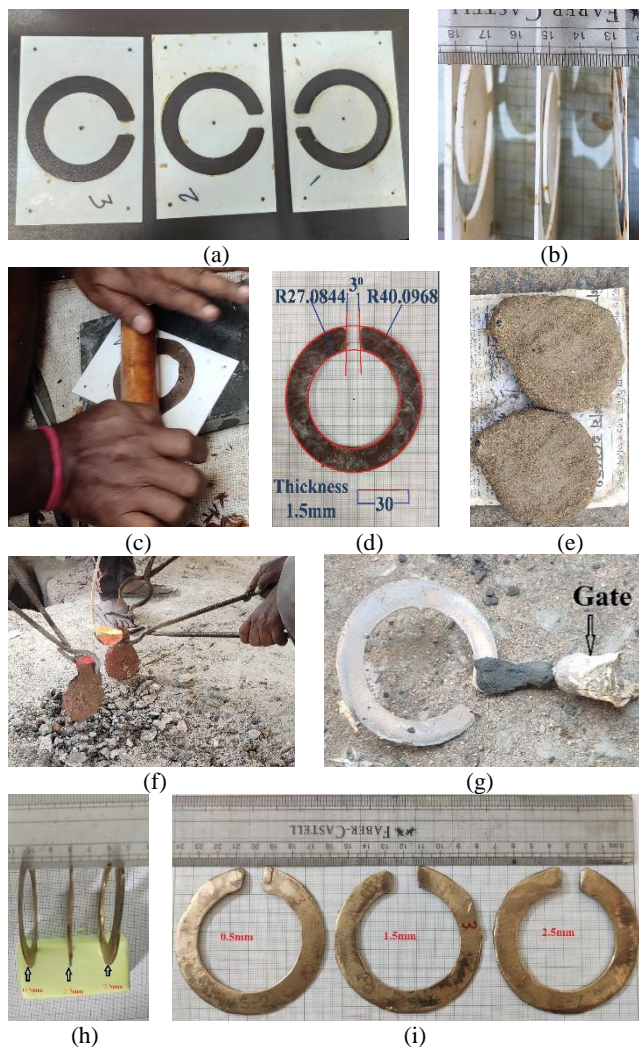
Different steps of sample preparation (a) Die (b) Side view of die (c) Wax pattern making (d) Complete wax pattern (e) clay moulds (f) Liquid Metal pouring, (g) Unfinished product with gate (h) Final product (side view) (i) Final product (top view)
